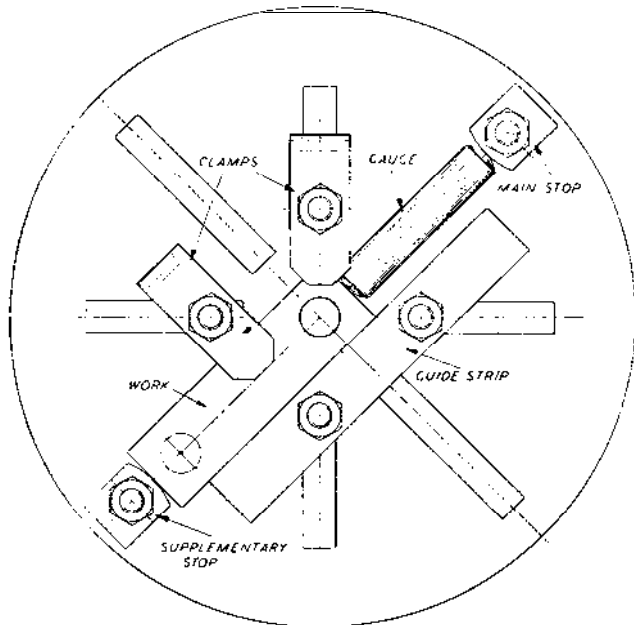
Method of setting up the cross-bars to drill holes for slide bars.
